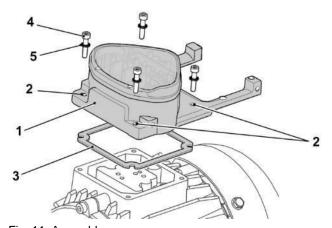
Assembly sequence: Connection box – adapter plate (sizes A - C)
